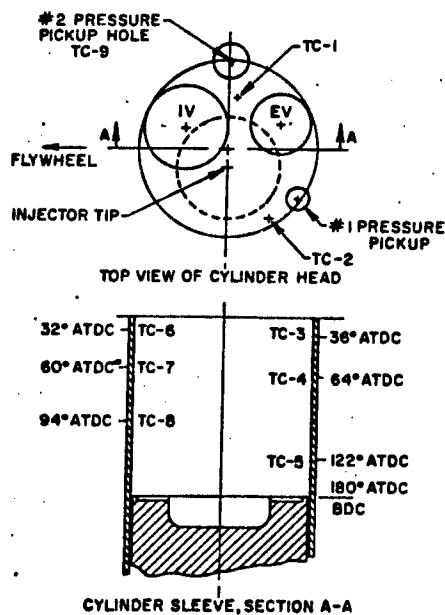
Cylinder head and sleeve geometry showing thermocouple locations.
